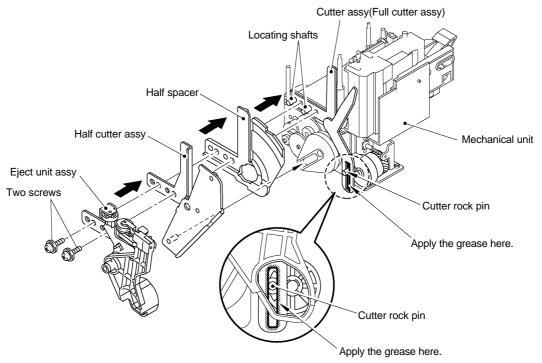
Reassembly of the Cutter Assy, the Half Spacer, the Half Cutter Assy, and the Eject Unit Assy
